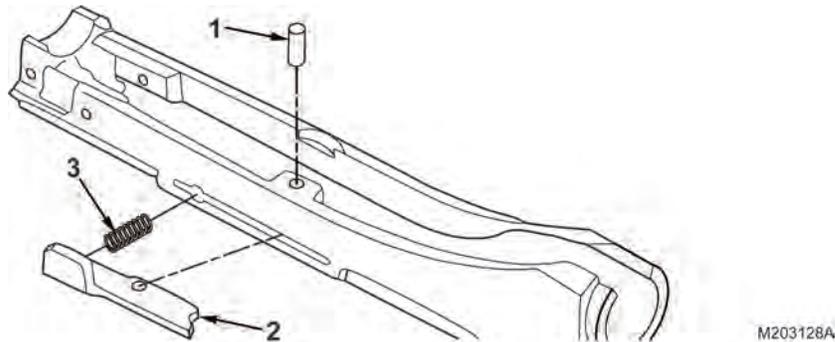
Barrel Latch and Compression Helical Spring Removal.
